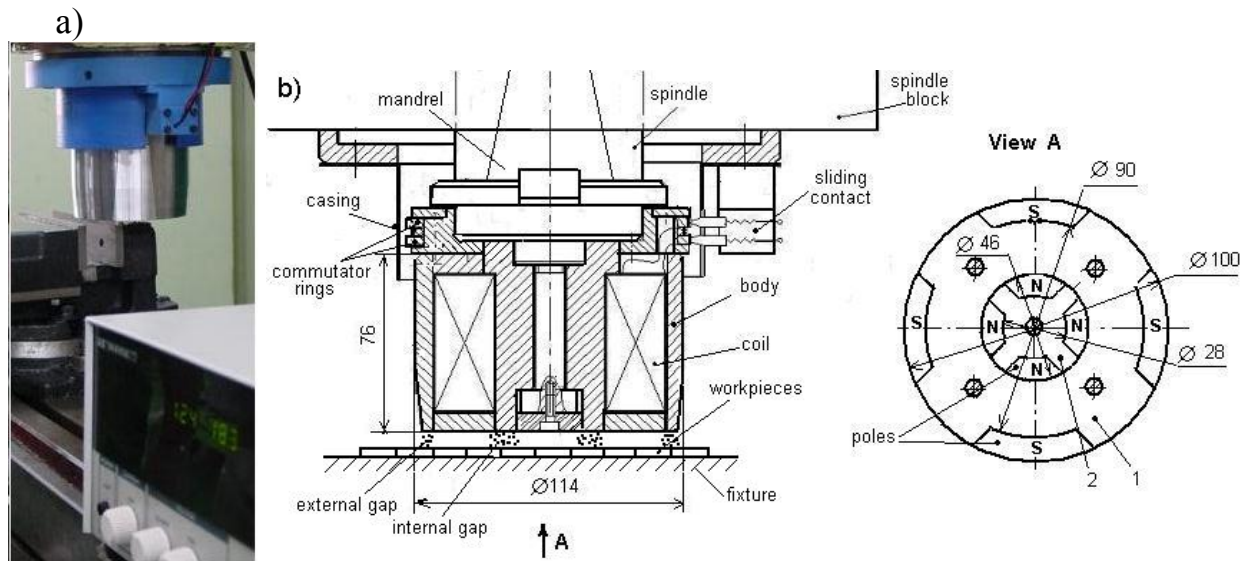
The general view (a) of the magnetic inductor fixing at the milling machine and its structure (b)
